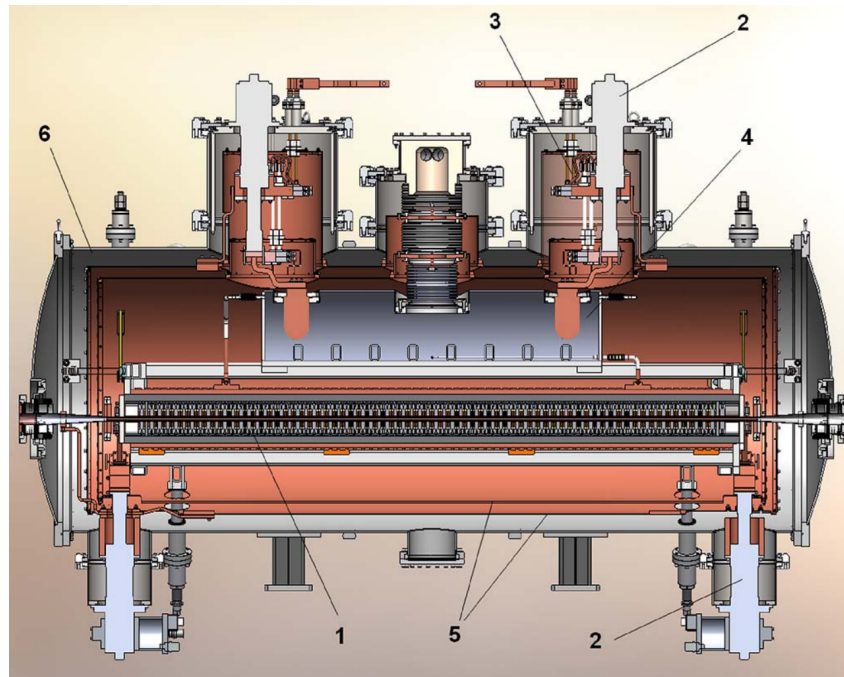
Exemplary sectional view of a cryostat for superconducting insertion devices using a thermosiphon-based conduction cooling scheme. The example shows the CLIC damping wiggler prototype manufactured by the Budker Institute of Nuclear Physics and installed in the Karlsruhe Research Accelerator (KARA). A similar cryostat design is used for the APS superconducting undulators. 1: wiggler magnet, 2: cryo-coolers, 3: current leads, 4: internal liquid Helium reservoir, 5: radiation shields, 6: vacuum vessel. Graphics reproduced from [107]
